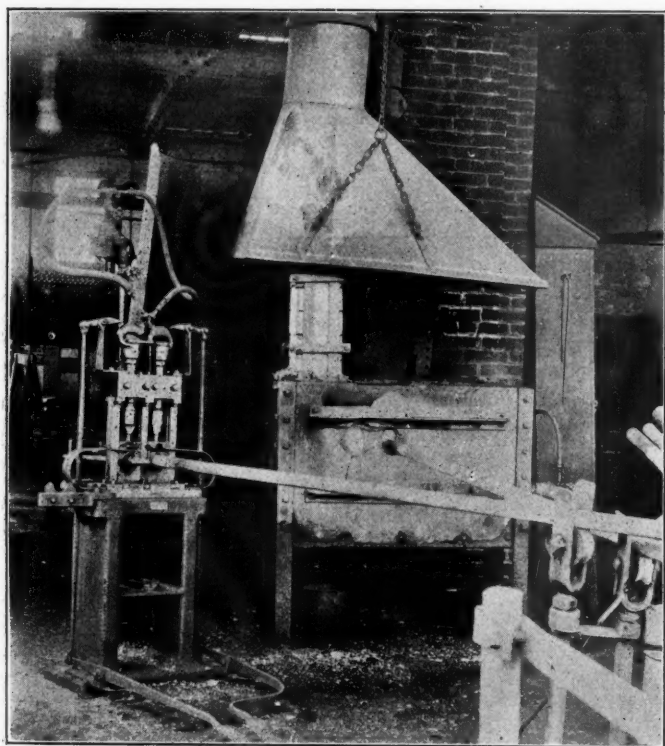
Machine for Welding Safe Ends on Tubes.
